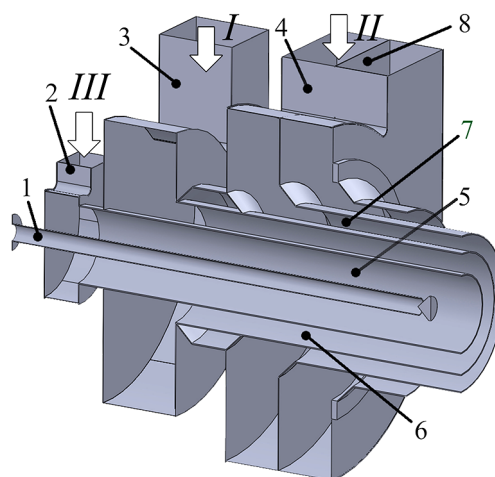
Axial section of the swirl (“coil”) burner of the TPP-210A boiler:
